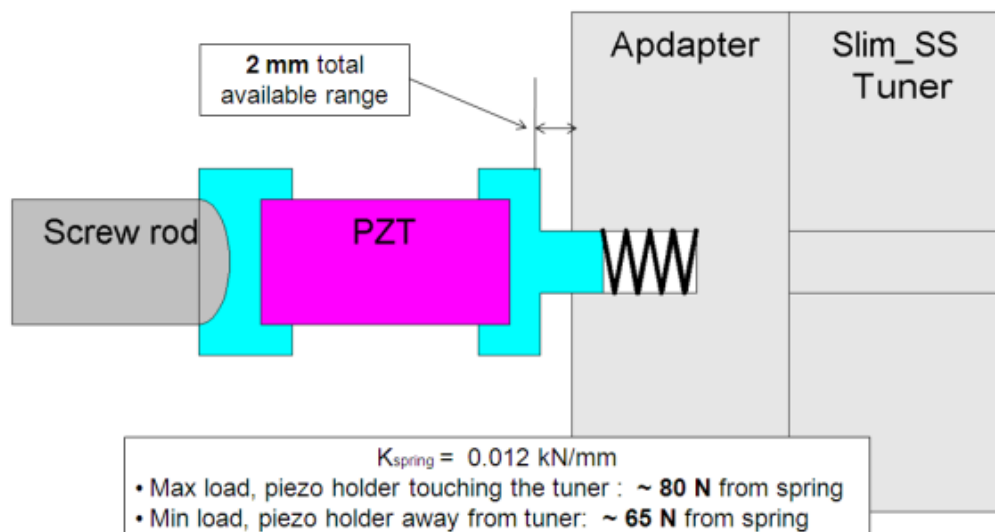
Basic design of piezo holder spring insertion for the new tuner design
